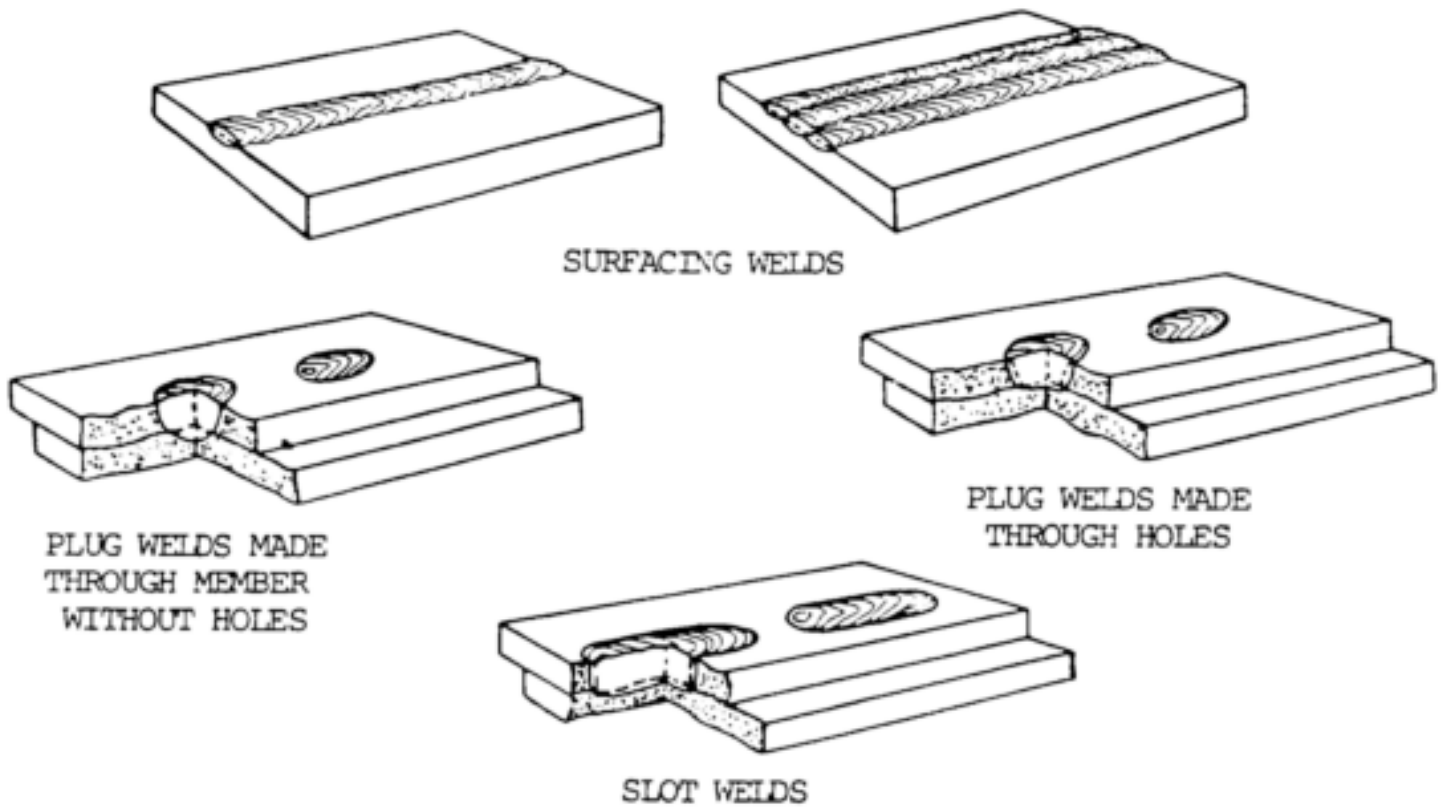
Surfacing, plug, and slot welds.
